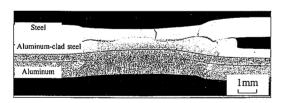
Cross-sectional structure of steel-aluminum spot weld (welding current: 10.8 kA, welding time: 0.2s)
